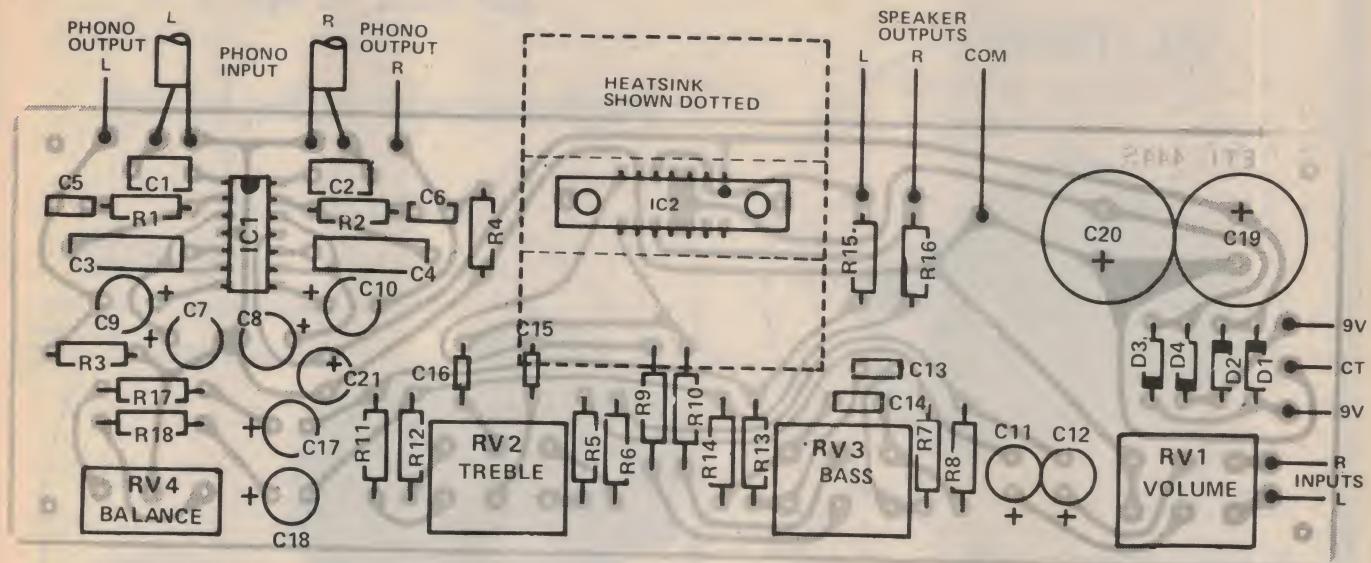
The new PCB design. Full size 195 x 63 mm.
